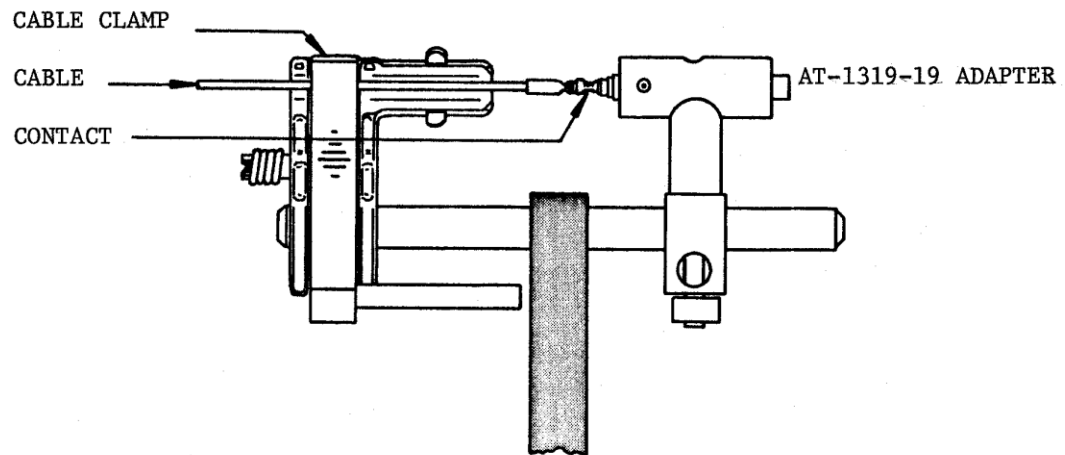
HOLDING FIXTURE AND AT-1319-19 ADAPTER WITH CONTACT/CABLE ASSEMBLY
